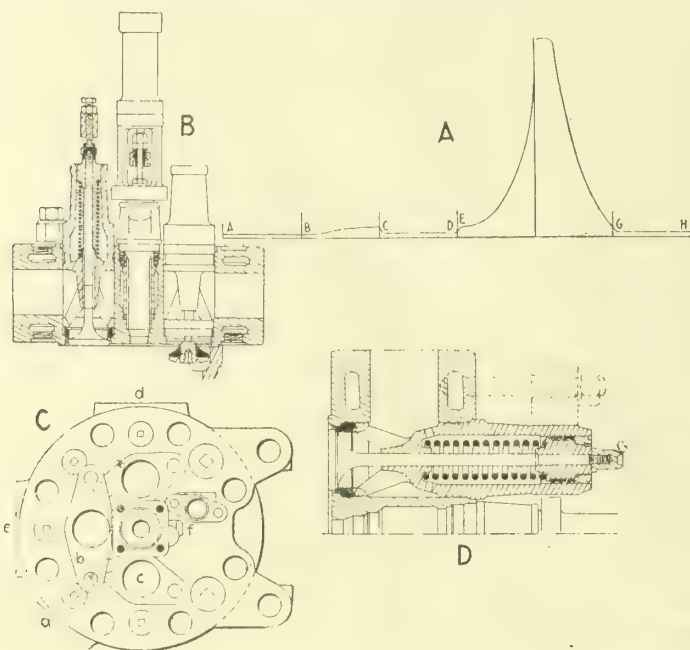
SCHIMANEK SIX-STROKE CYCLE INTERNAL-COMBUSTION ENGINE.
